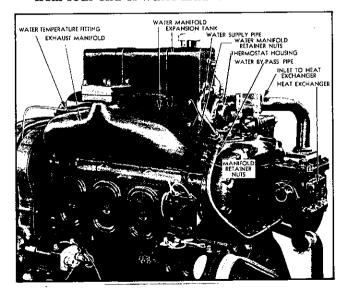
Water Manifold and Connections— Heat Exchanger Installation.
